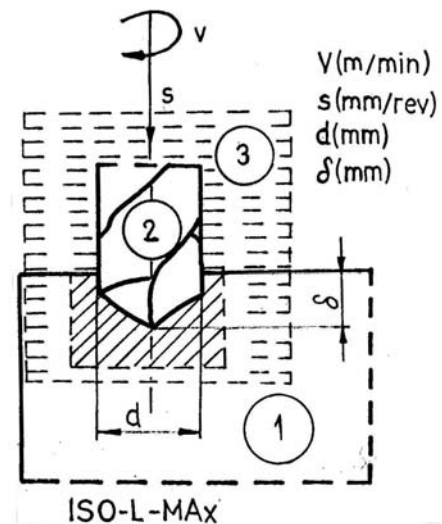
Drilling process, v -cutting speed, s -feed, d -diameter of drill, δ -drilling depth
